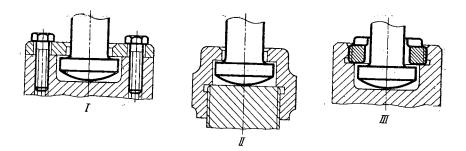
Axially loaded rotary joints. Locking element is installed from the opposite end of rod. Rod head is fixed by flange (I) and by nuts (II, III)
